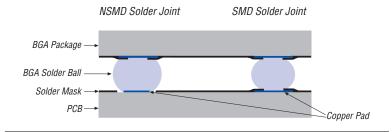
shows the side view for an NSMD and SMD solder joint.
